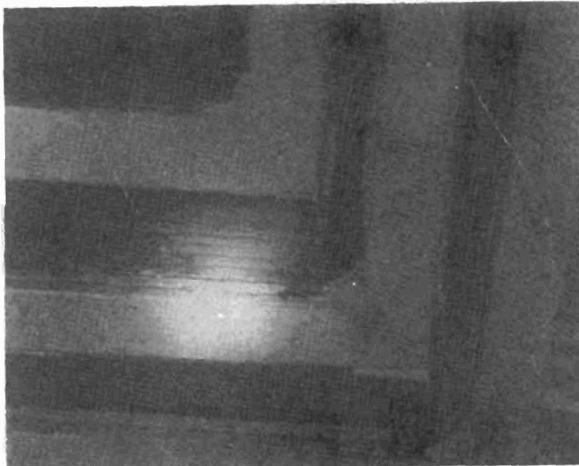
STG #20 Generator Rotor winding, coupling side, positive of black deposits, as opened.
